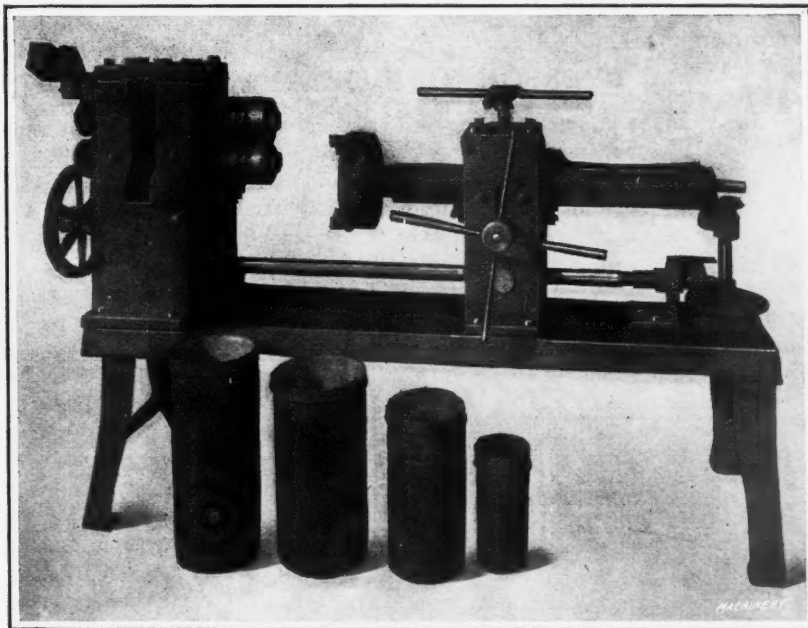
Rotary Type of Embossing Machine developed by Julius Merer
